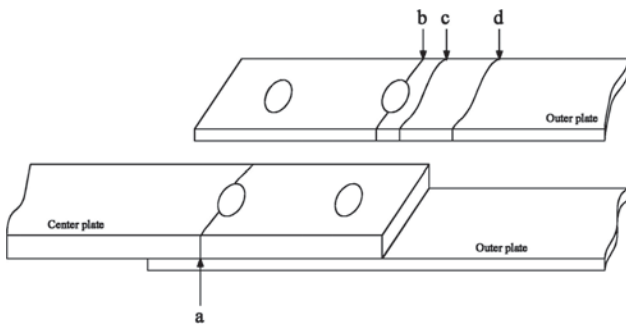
Location of fatigue failure for lap joint specimens.
